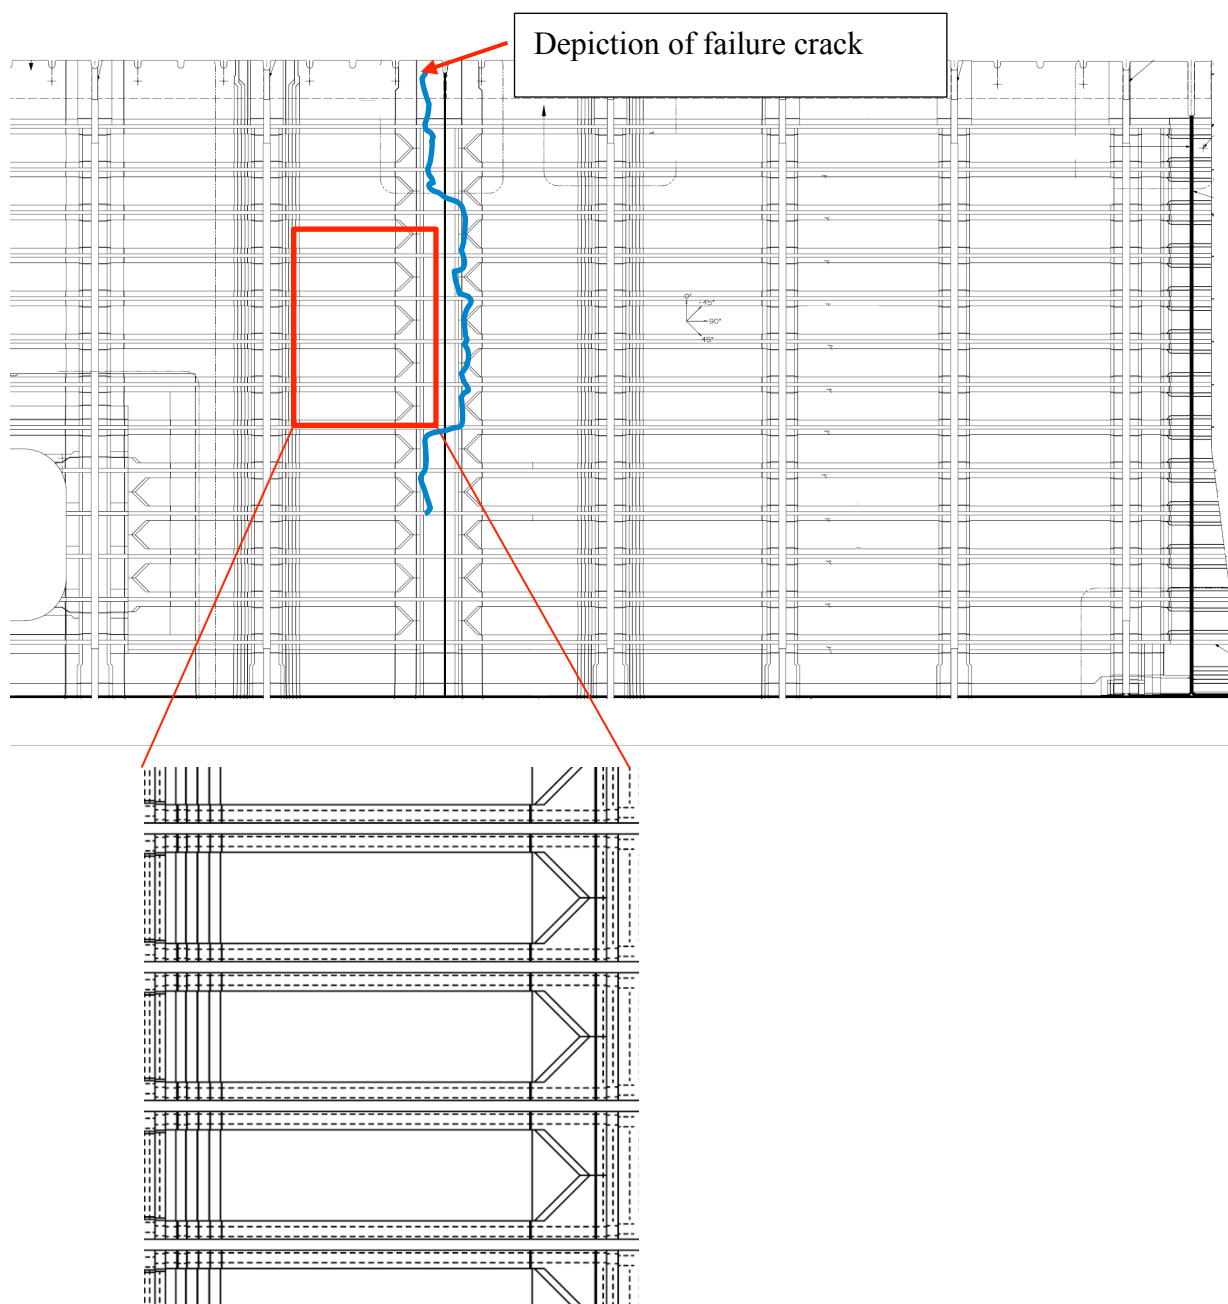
Location of the aft bulkhead failure crack in relation to the structure geometry.
